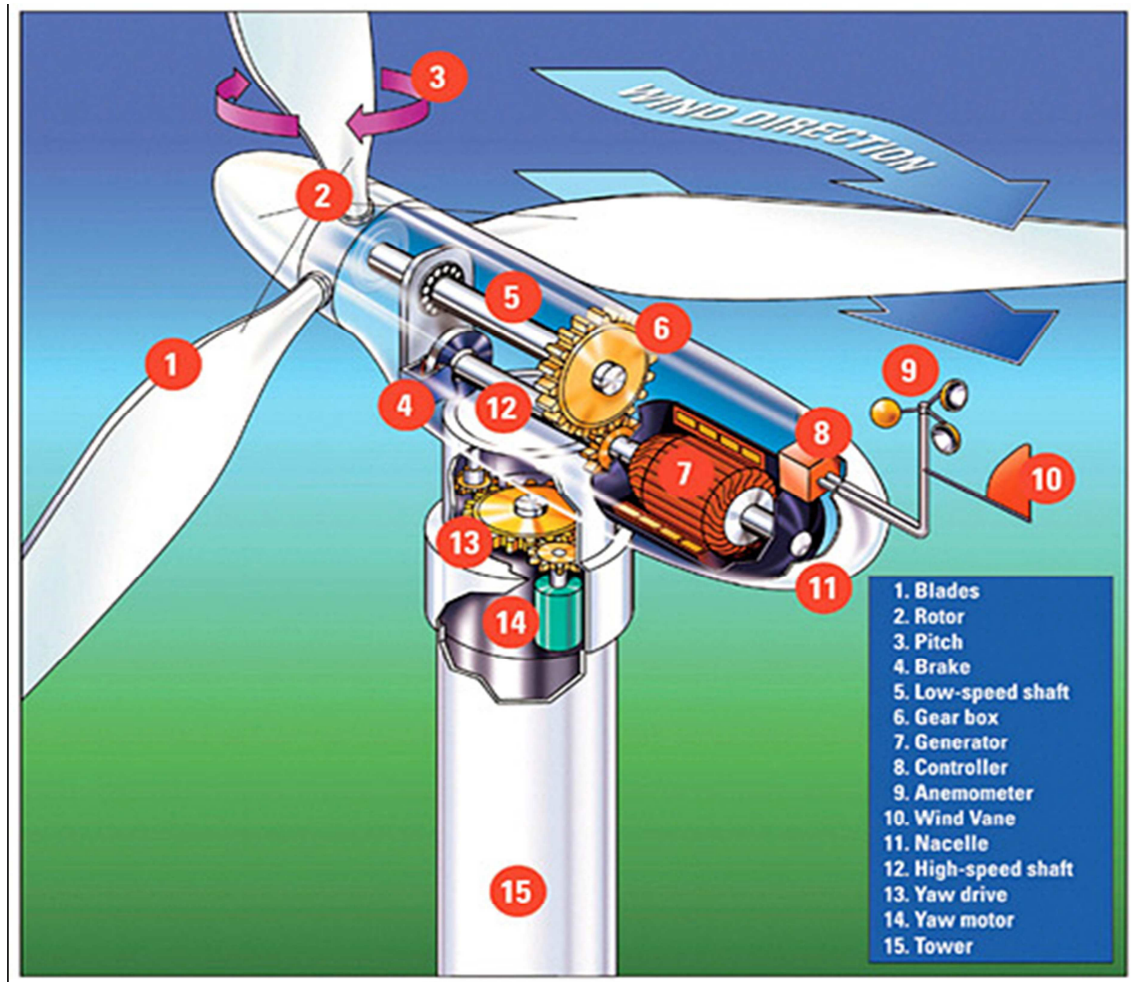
Assembly of a horizontal axis wind turbine⁶⁴
